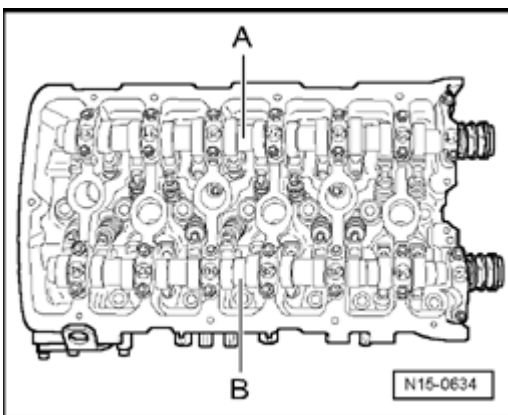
Intake/Exhaust Camshaft - Cylinder Bank 2 (Left)
